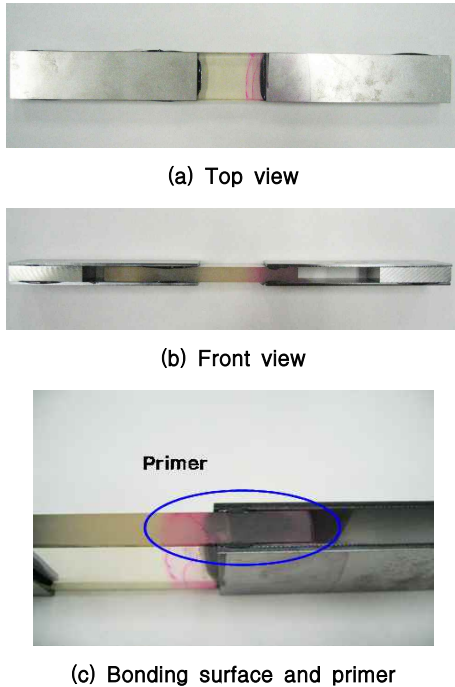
Manufactured double lap shear specimen : Zerodur-steel specimen
